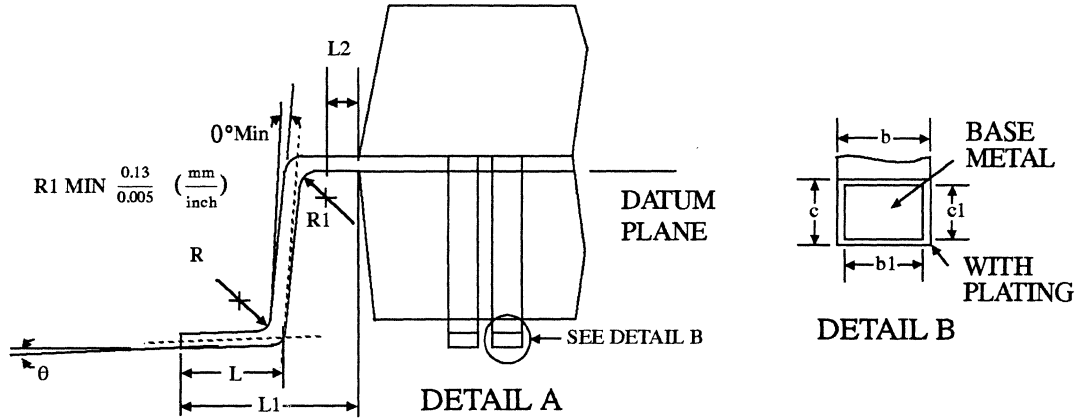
Mechanical Packaging Specifications (Detail A and B)
